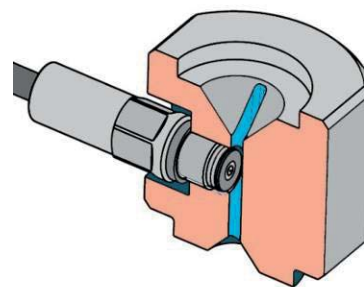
Schematic view of sensor Type 6613CG... installed in patented ring adapter
